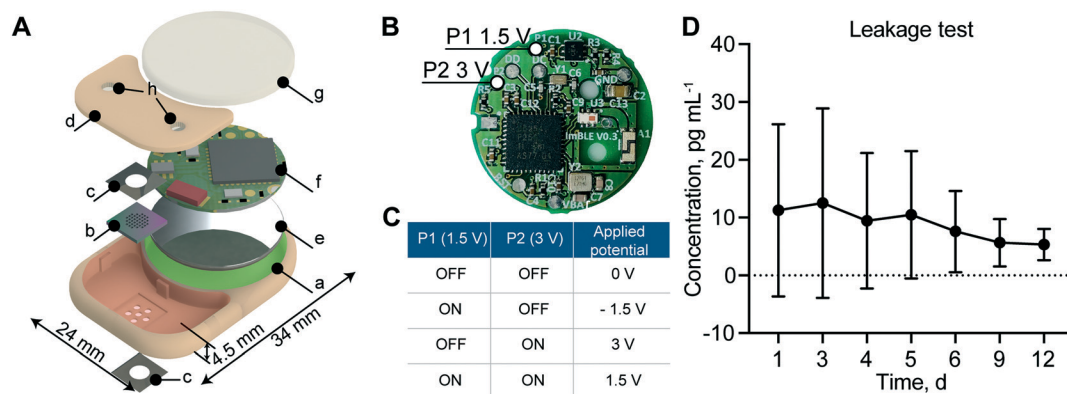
Implant components, configuration and leakage test. (A) Exploded view rendering of the implant: a. PEEK body; b. silicon nanofluidic membrane; c. platinum foil electrodes; d. PEEK lid used to seal the drug reservoir; e. battery; f. printed circuit board (PCB); g. epoxy sealant; h. silicone drug filling ports. Red and green highlighted areas are the reservoir compartment and the circuitry chamber, respectively. (B) The printed circuit board (PCB) with the two GPIO pins P1 and P2 highlighted, which can apply 1.5 V and 3 V to the electrodes, respectively. (C) Schematic of possible voltages that can be applied to the membrane. (D) Detection of rhodamine B concentration in sink solution over 12 days. Data are represented as mean \pm SD ($N = 3$).
